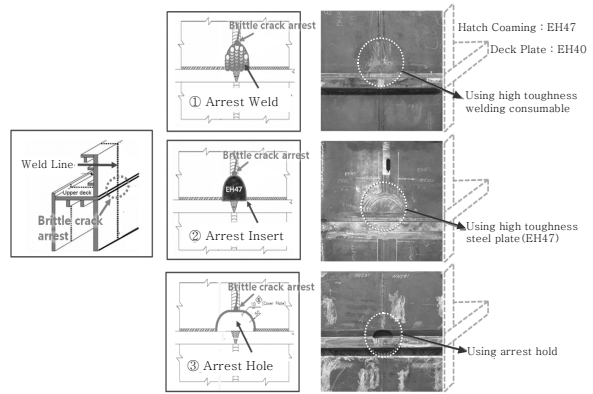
Brittle fracture prevention solution using arrest weld, arrest hole, and arrest insert
